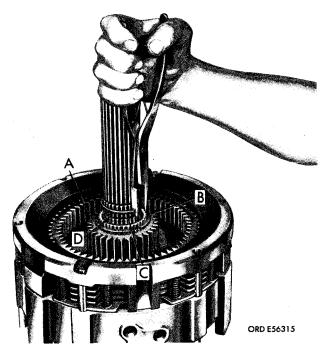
(Step 16). Install reverse sun gear (A). Install snap ring (B) and wire-type snap ring (C) in groove (D).
